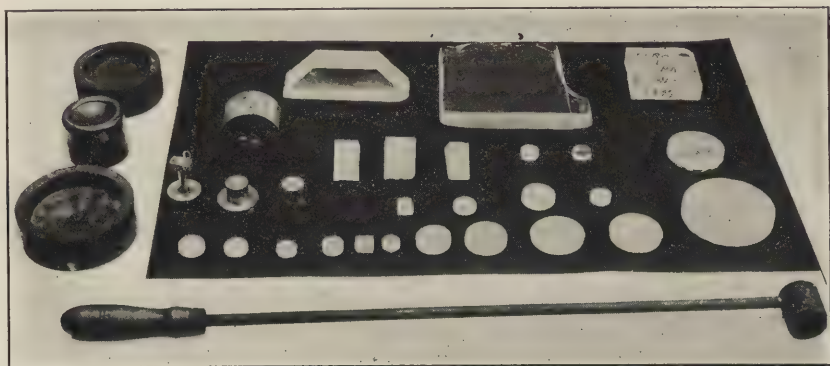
Molded prism and lens blanks; and the molds for pressing them. Frankford Arsenal.)
